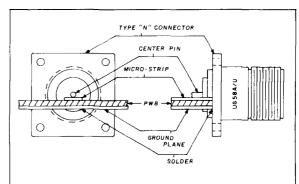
Inexpensive end launchers are formed by modifying common coaxial connectors.
